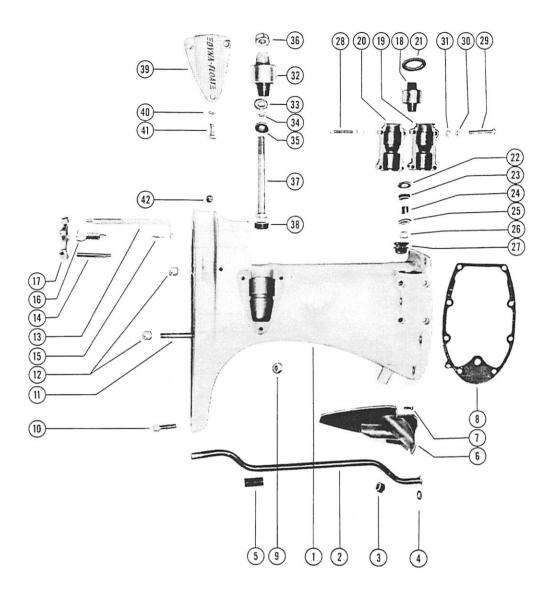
Drive Shaft Housing and Dyna-Float Mounts
